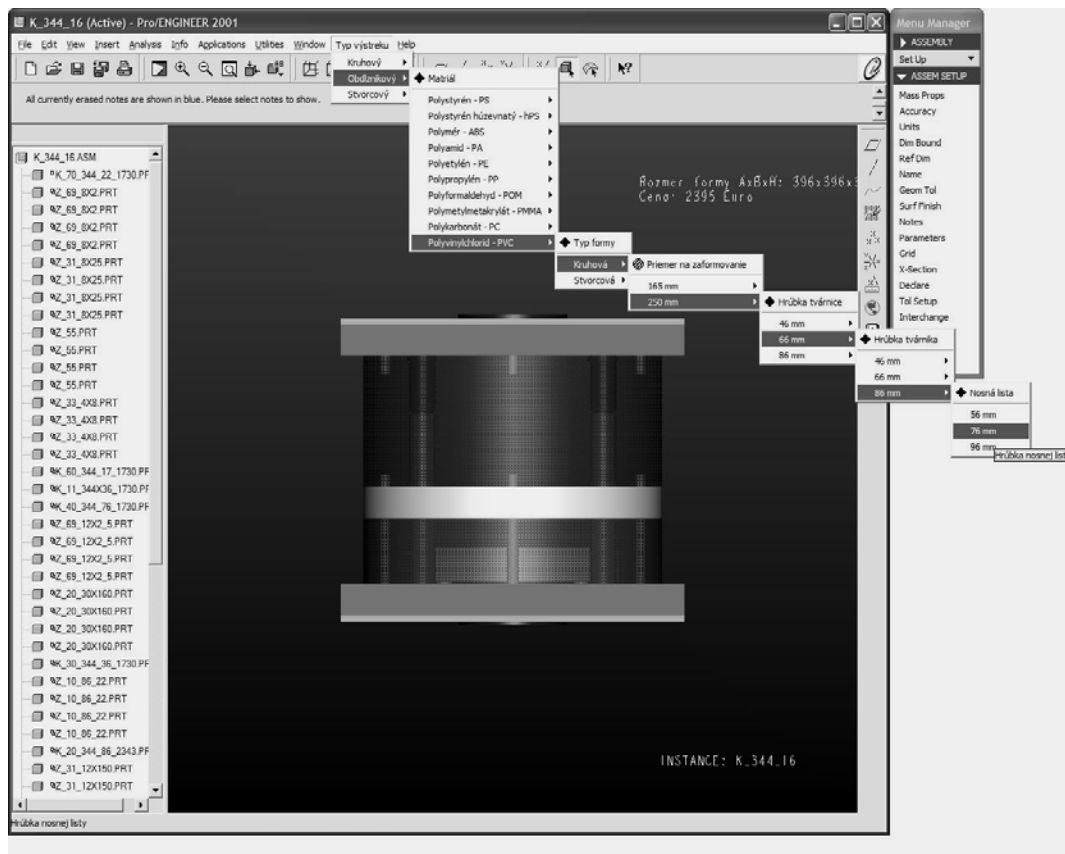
Automation modifications assembly of moulds at the system Pro/ENGINEER
